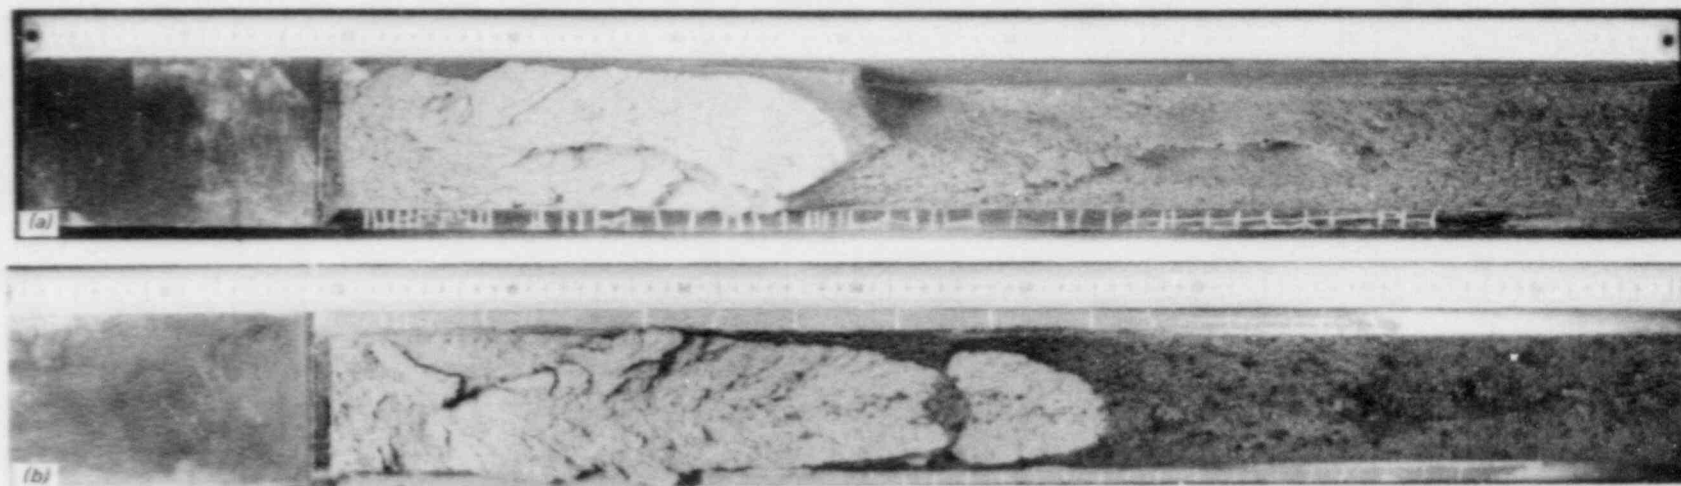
Fracture surfaces of (a) WP-1.1 and (b) WP-1.2. Notch and precrack are on the left-hand side. Cleavage fracture appears light while fibrous fracture is dark. Arrest points occur at the end of the cleavage fractures.
